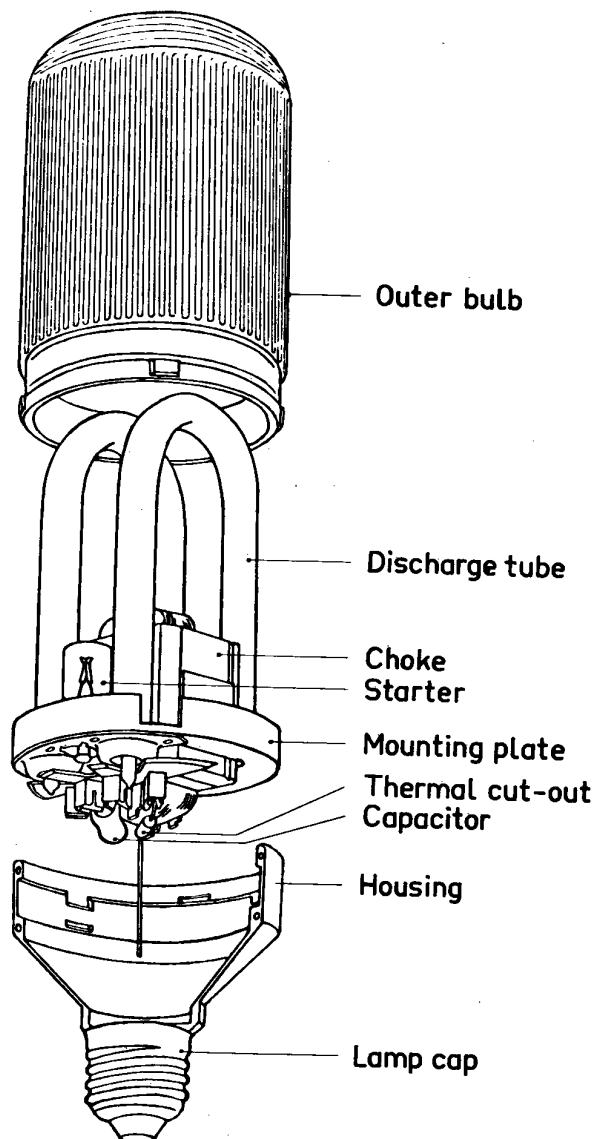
Exploded view of an SL-lamp. Ballast, starter and the folded discharge tube are integrated in one single unit.
